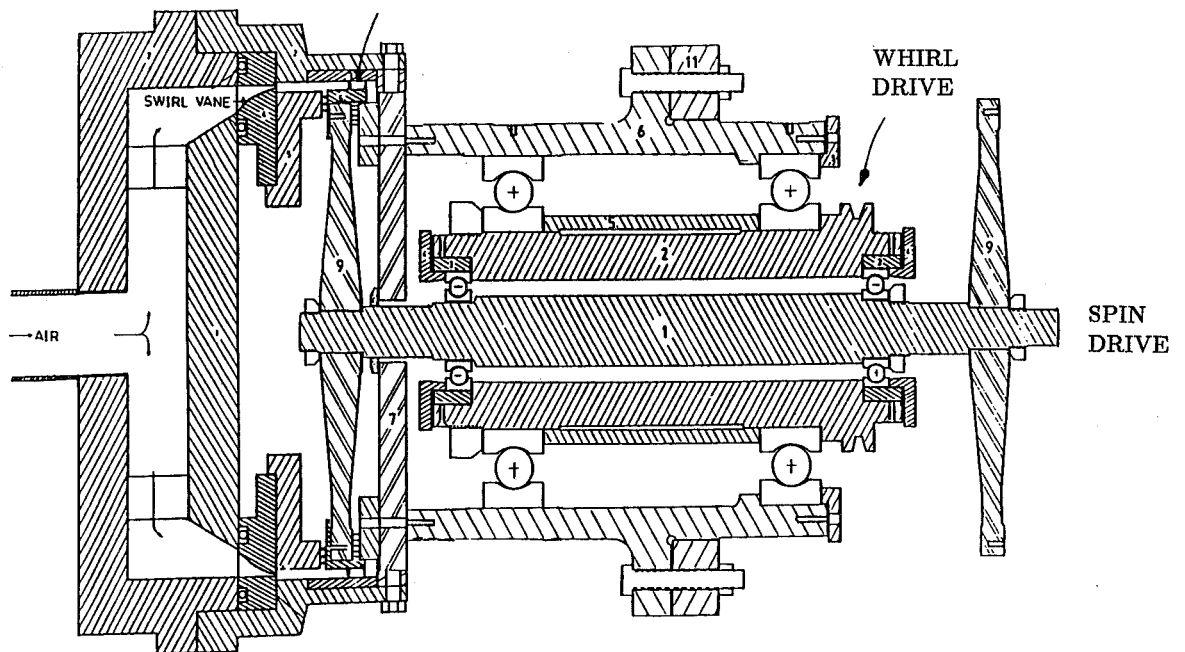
Cross-section of test section along with whirl/spin producing rotating machinery. The air flow through the apparatus is shown by arrows.
